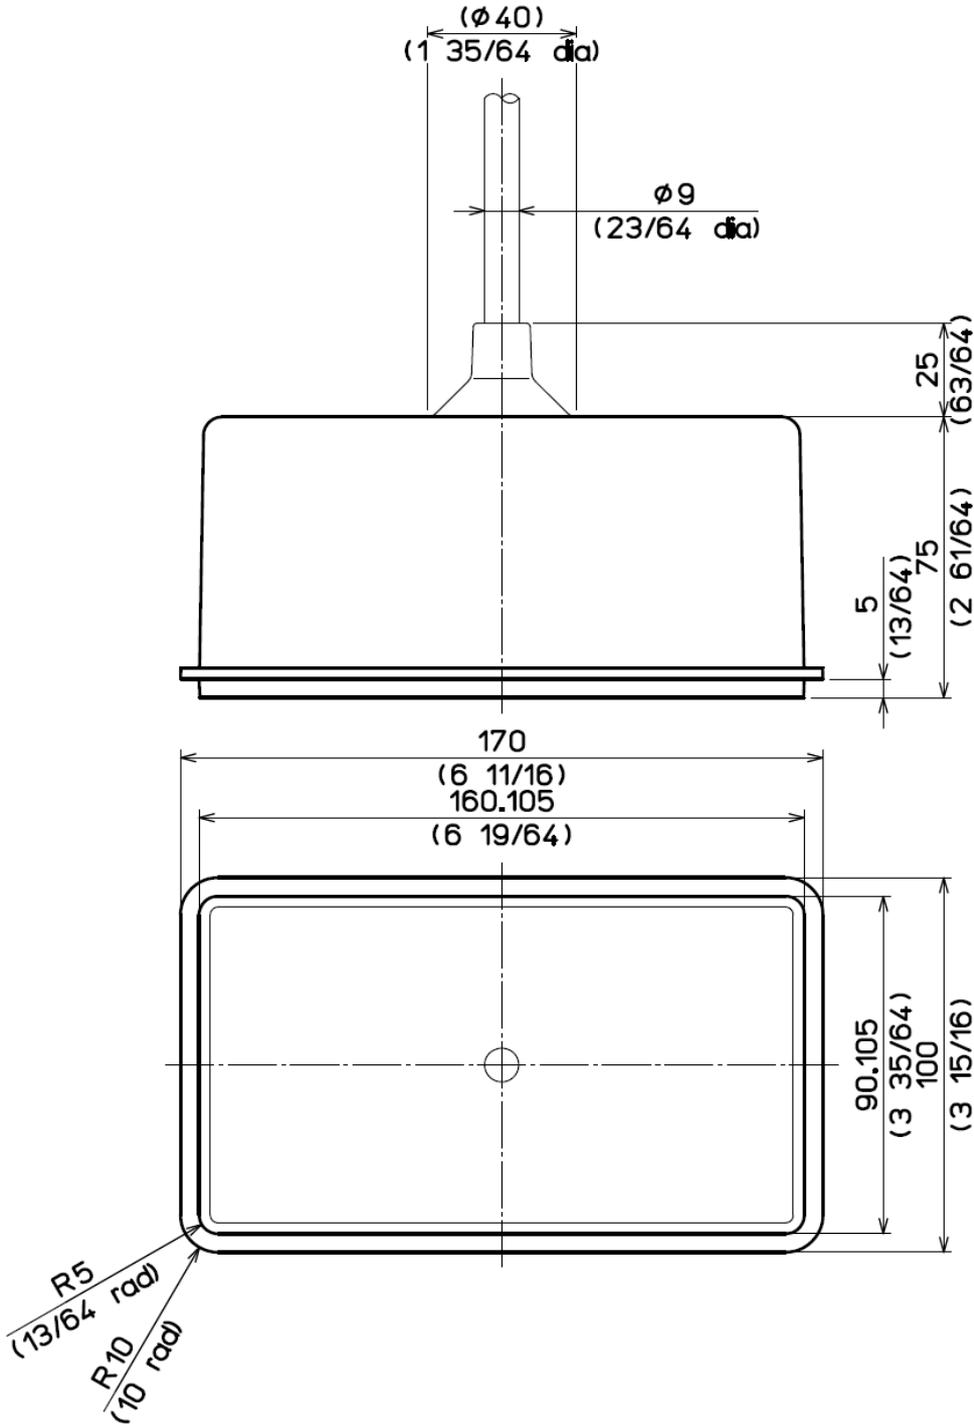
Outline dimensions of a transducer (TD340-K)
